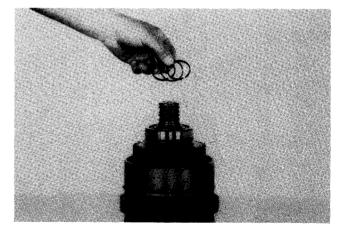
Remove clutch shaft piston rings. (See note in Figure 103.)
